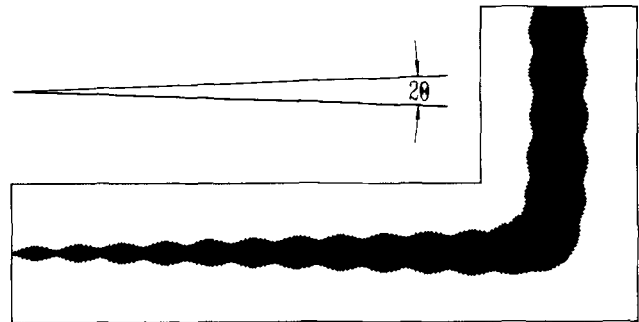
Cross section of a plate casting where a thermal gradient in the feeding direction creates a tapered liquid pool in the center, which may feed the casting. No shrinkage occurs.
